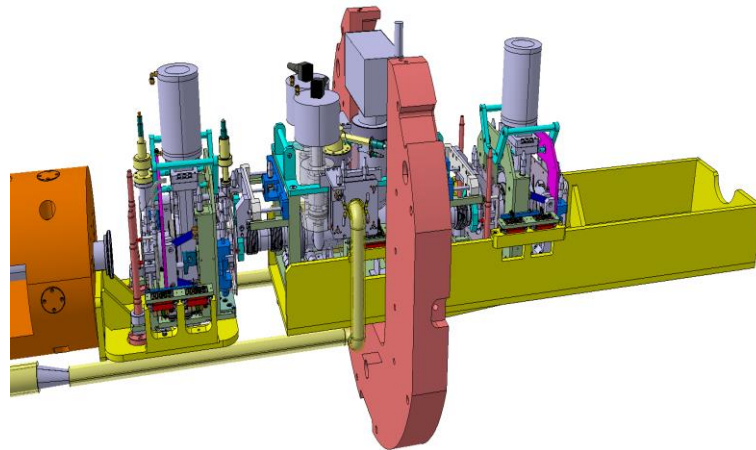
Right- cut of the Vacuum module assembly (VAX) installed on the IP side of the TAXS with all-metal gate valves.
